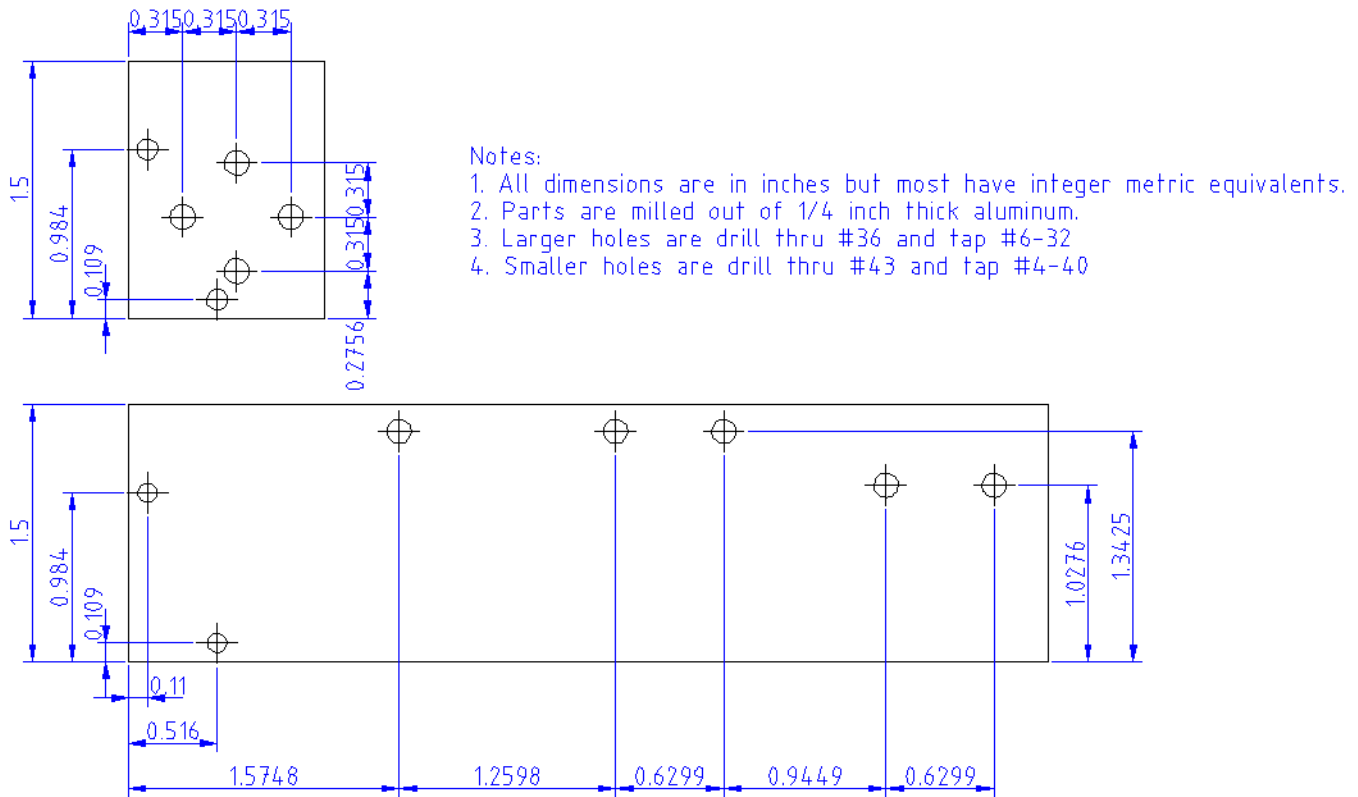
Dimensional drawing of the impact and floor sensing switch mounts.
